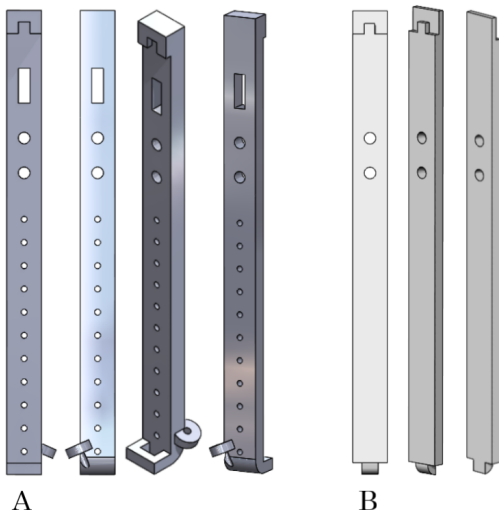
Different views on design of the sensor holder (A) and back plate (B)
